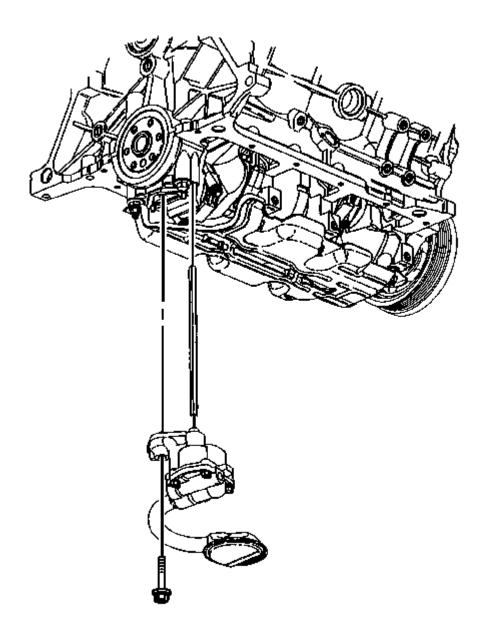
Removing/Installing Oil Pump & Oil Pump Drive Shaft Courtesy of GENERAL MOTORS CORP.
